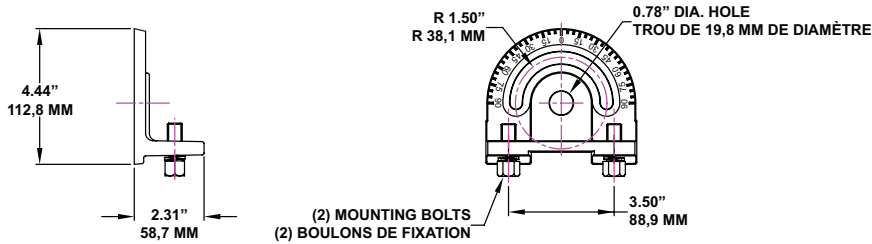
Crossarm Mounting Bracket (P/N: G-AM-8-CA) | Support de montage sur traverse (réf. : G-AM-8-CA)
